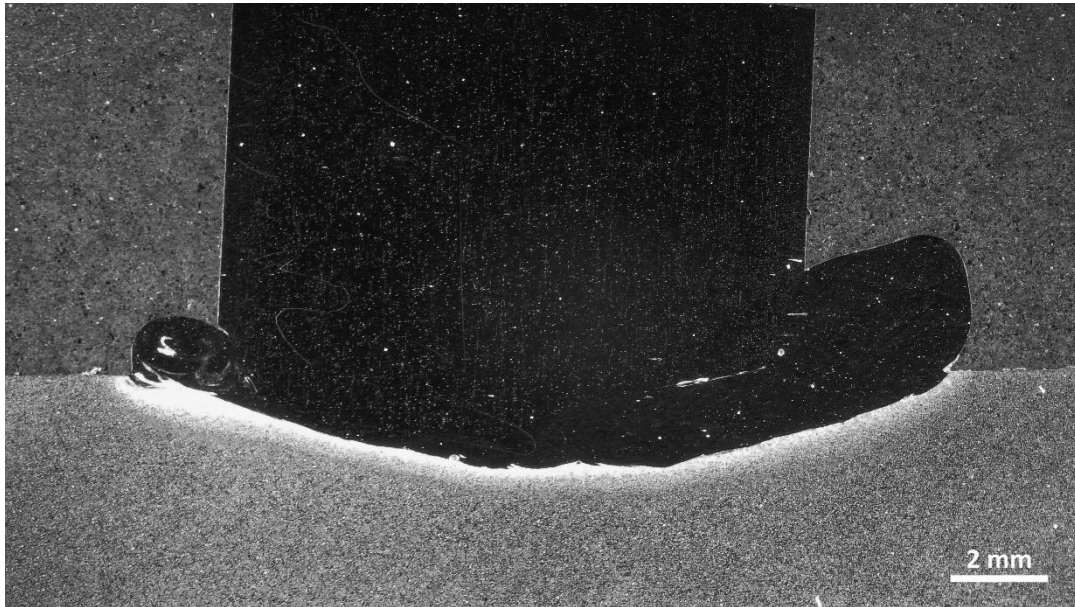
Macrostructure of the welded joint No. 3
